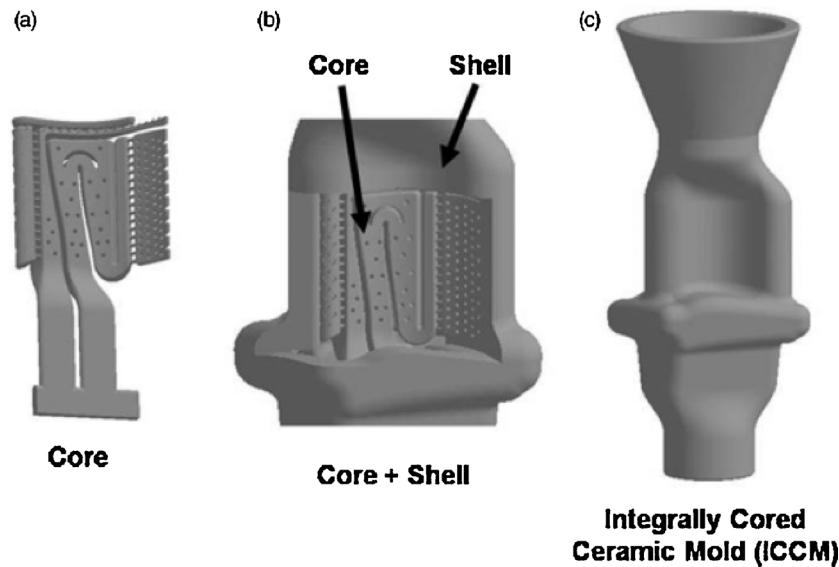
Mold design for turbine airfoil, including (a) ceramic core for internal passageways, (b) cross-section of mold, (c) external design of integrally-cored mold (reprinted with permission from Ref. [28]).
